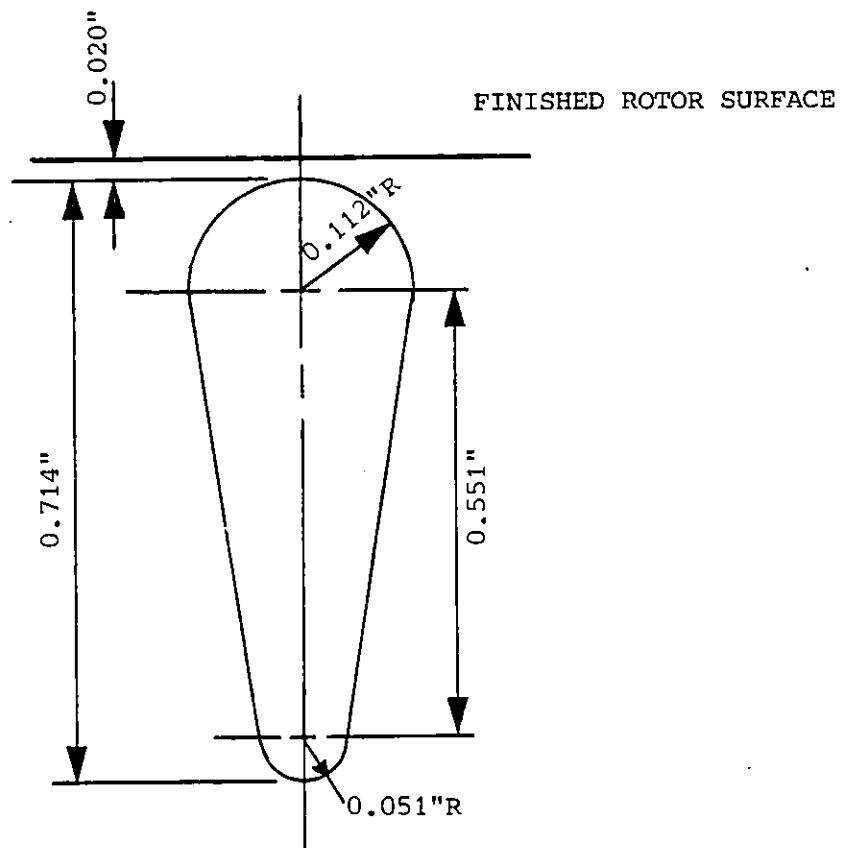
Dimensioned drawing of the test motor rotor slots
